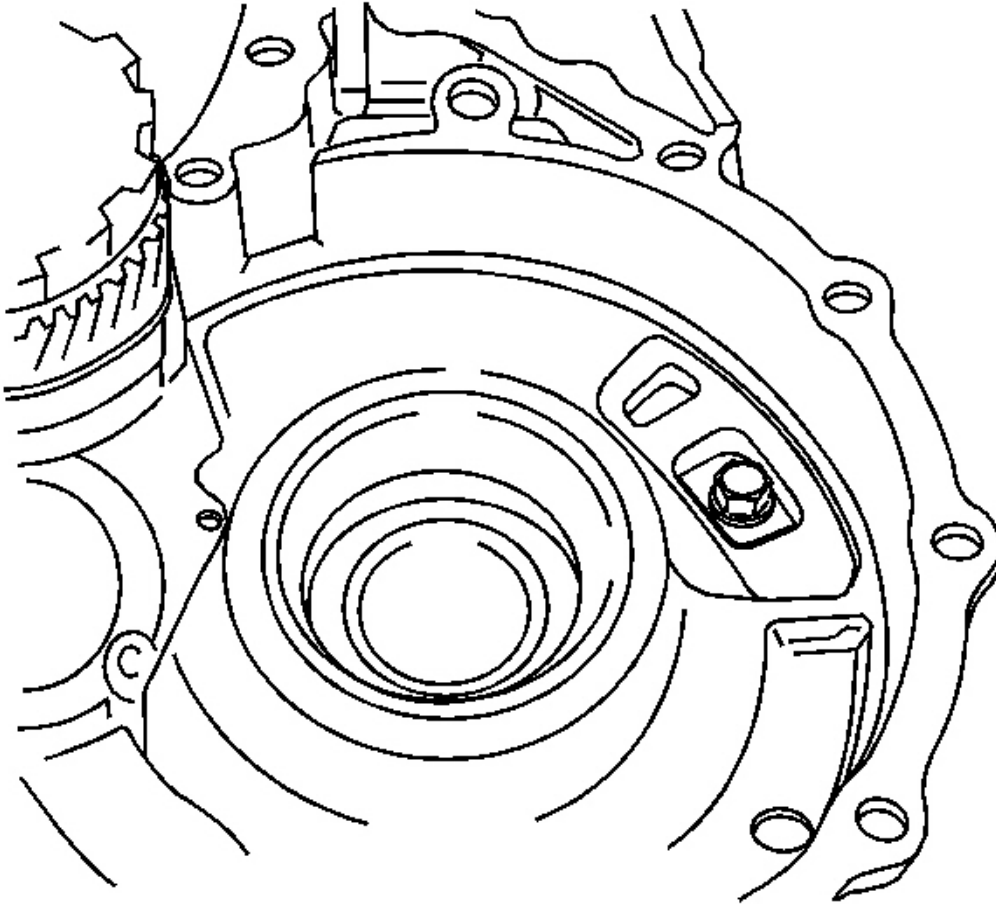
No. 1 Transaxle Case Plate & Bolt
